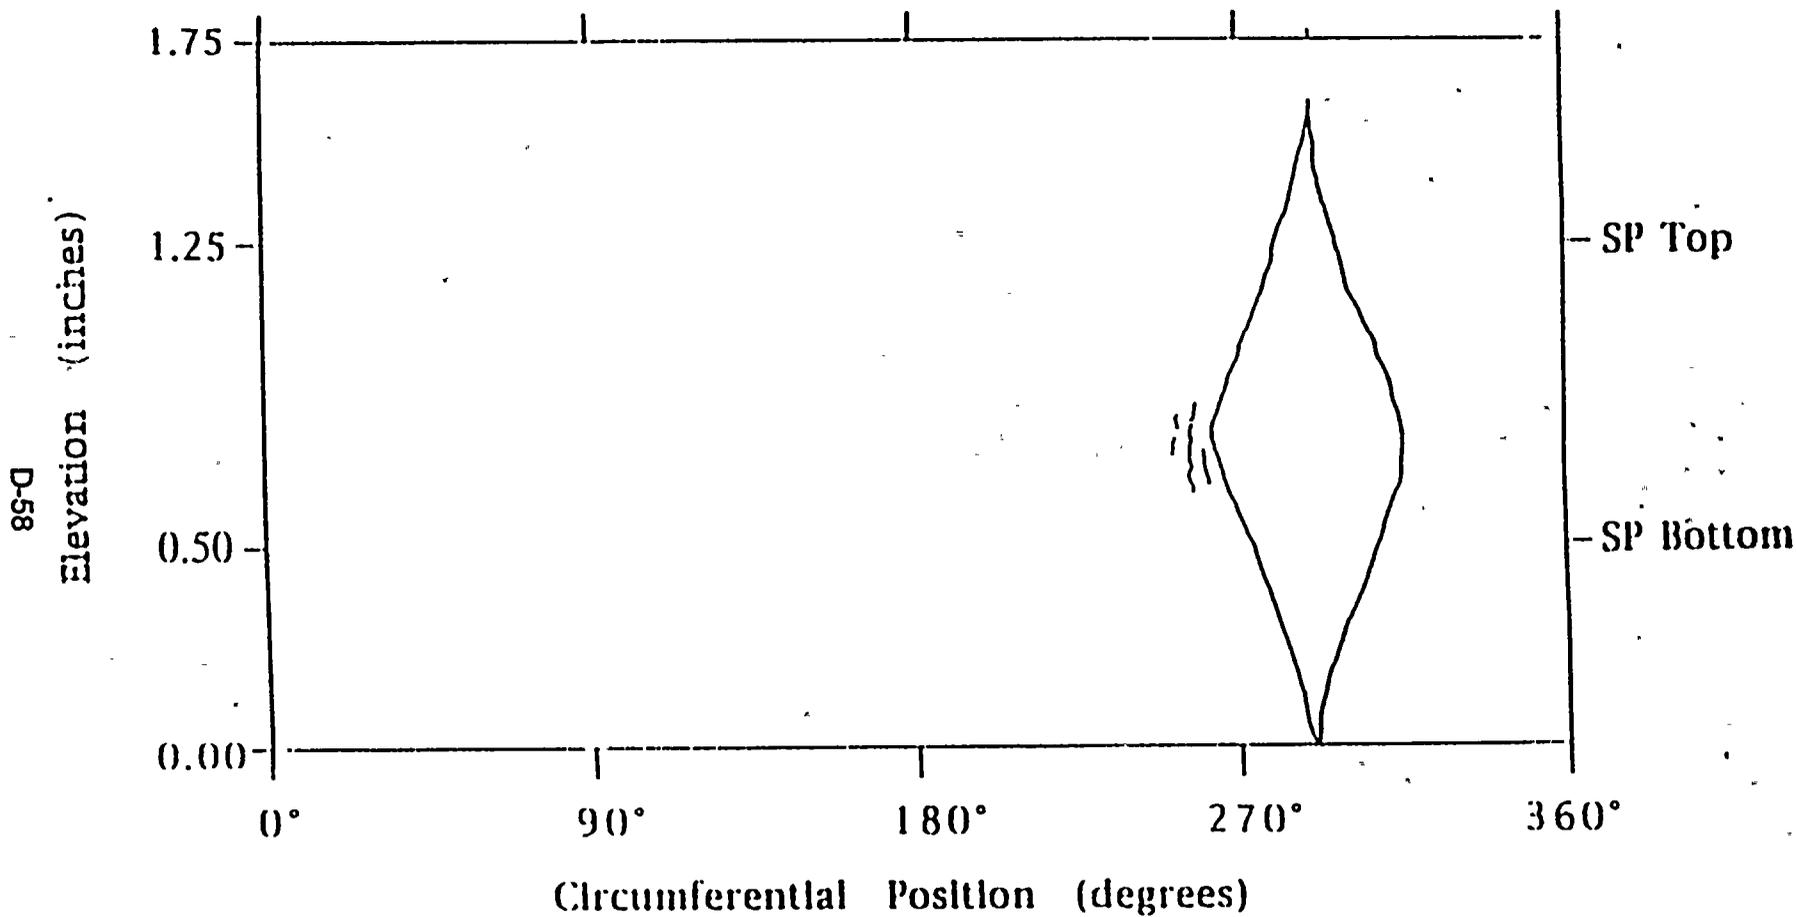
Sketch of the OD surface crack distribution found at the TSP2 region of Tube R12C32. Also shown is the location of the burst fracture opening, which had OD origin corrosion on its fracture face. The burst fracture opening extended beyond the TSP crevice region, but the corrosion cracking was confined to the crevice region. No ID corrosion was present.
